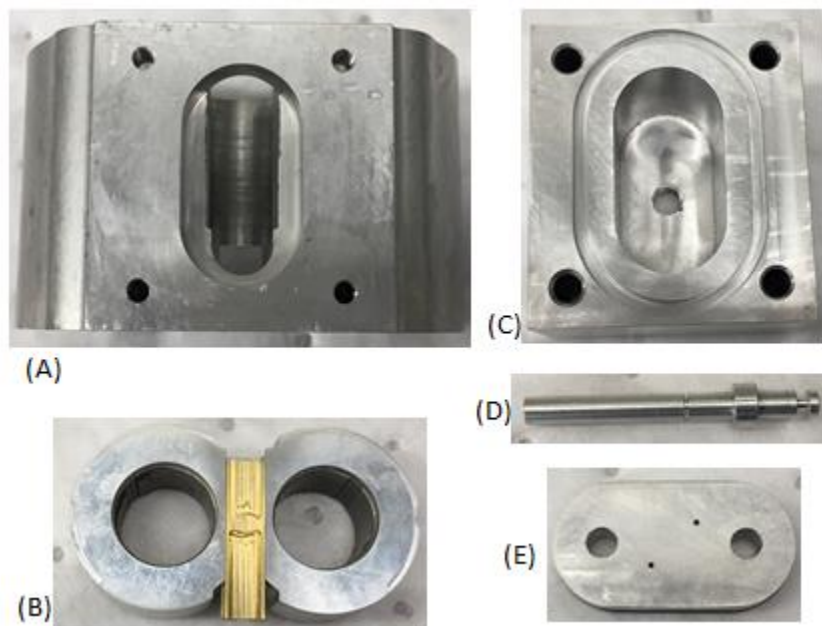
(A) Casing; (B) Bearing block with slider assembled; (C) Pressure compensator casing; (D) Connecting rod; (E) Piston.
